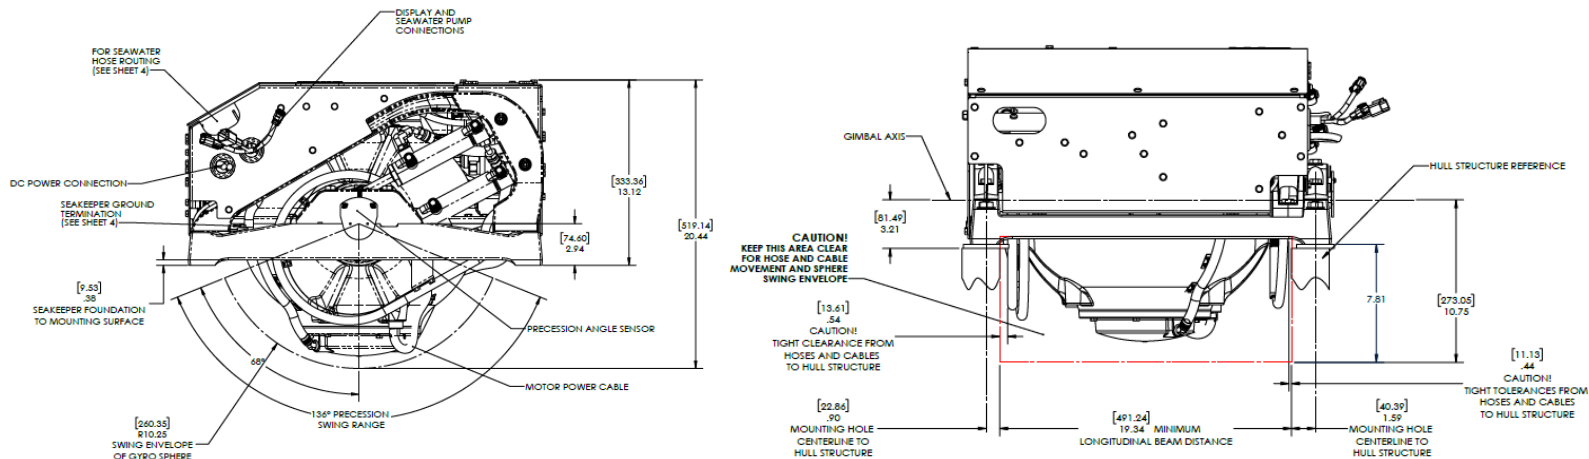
Seakeeper 2 Clearance Dimensions for Moving Hoses and Cables
